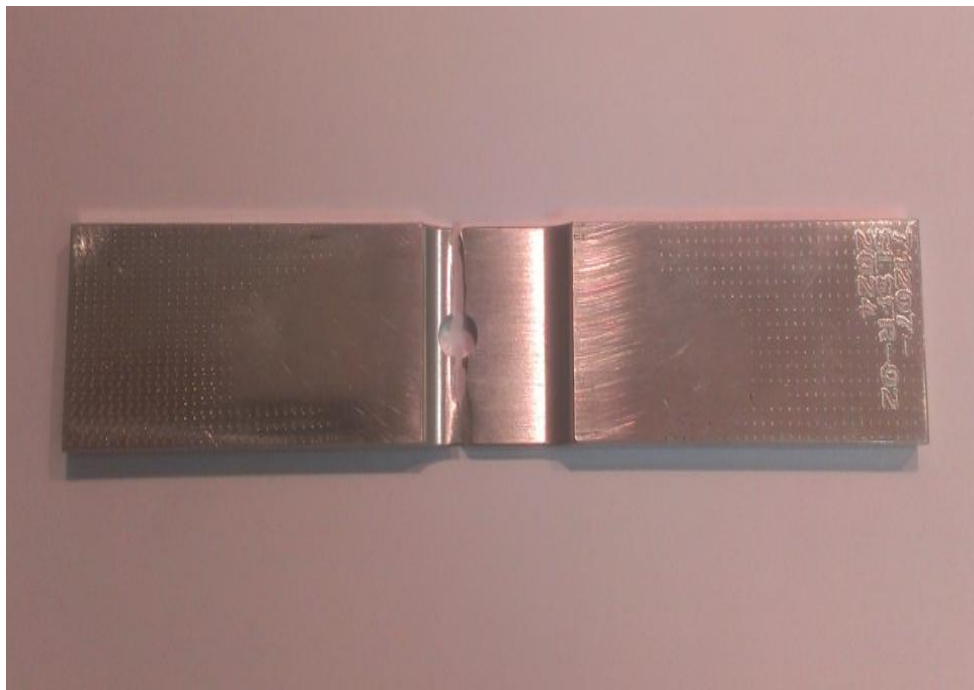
Open Hole in Radius Test Specimen -5 Post-Test Picture
